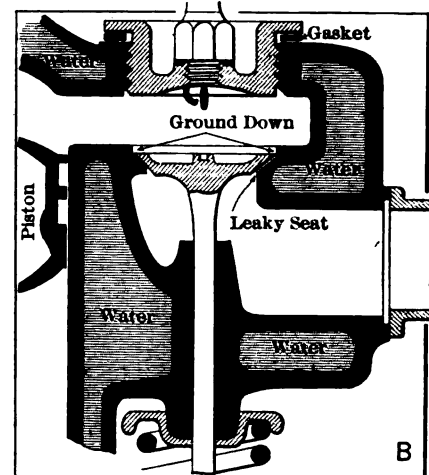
Showing how the valve has sunk and the seat worn away, due to grinding, also a leaky valve, due to improper adjustment of the push rods
